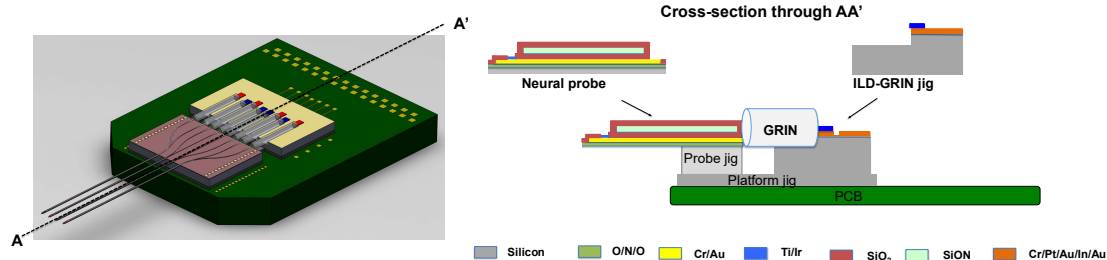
Device fabrication details along A-A' showing final assembly of fabricated components on PCB. The fabrication process steps are same as described in Figure 3-6.
